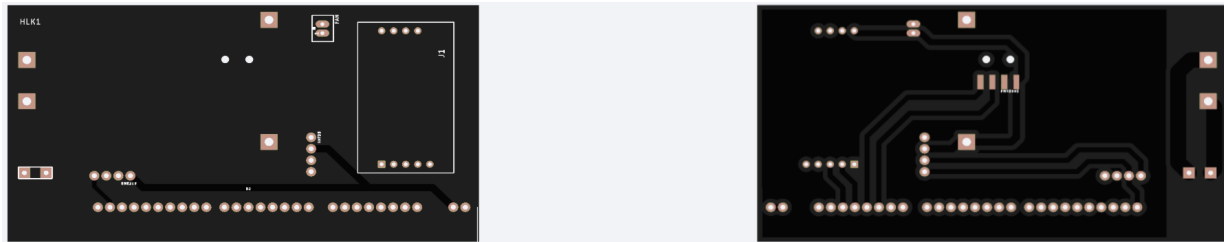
Custom PCB layout designed for the sensor node, showing component placement and routing for compact integration.
